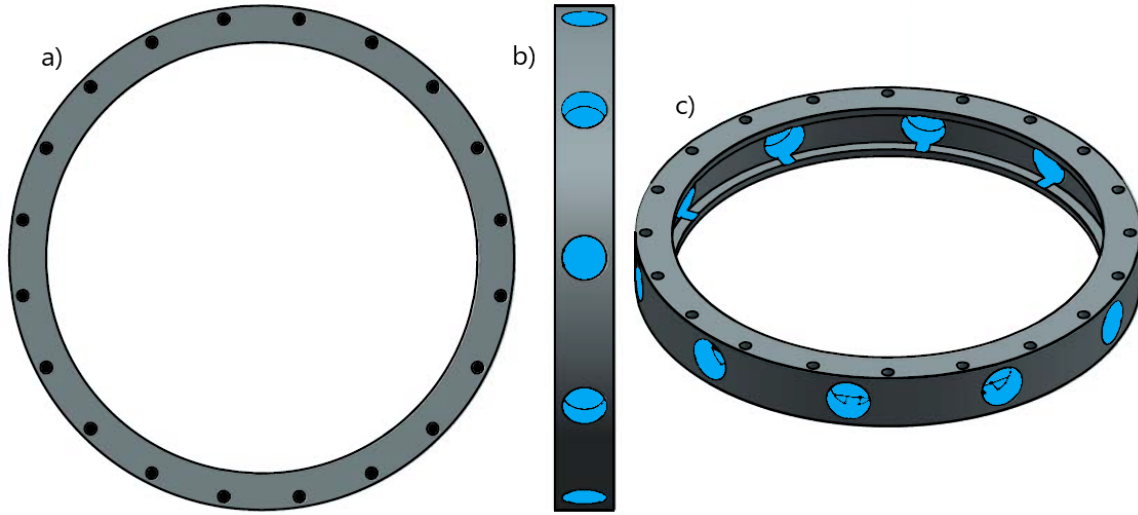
Radial RDE Spacer Ring. (a) Top View, (b) Side View, and (c) Isometric View.
